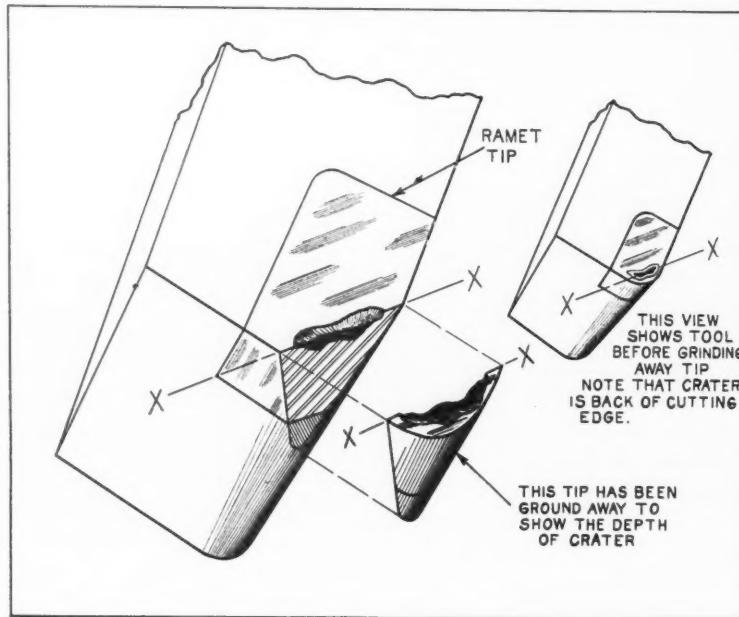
Drawing Illustrating the Formation of a Crater Back of the Cutting Edge of the Tool
